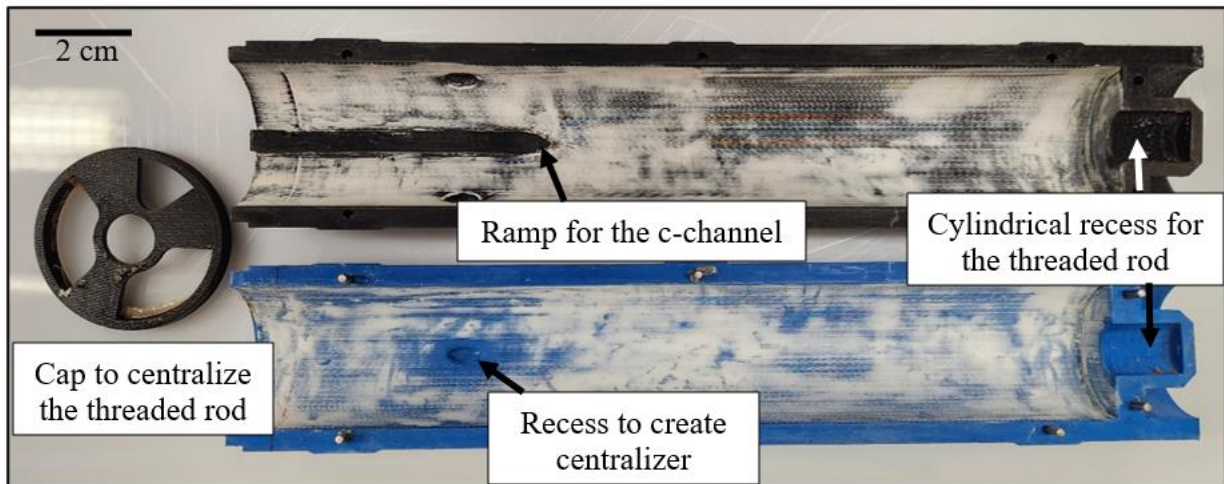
Inner mold for direct-push strainmeter. The inside was sanded and filled with epoxy putty to get a smooth surface after curing.
